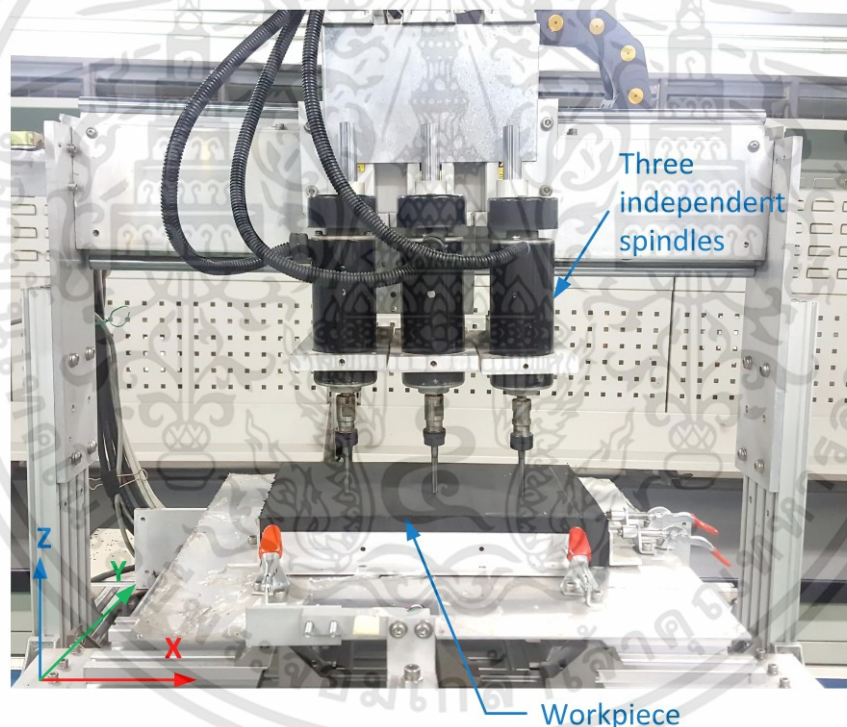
The first prototype CMI cutting machine with three independent spindles
